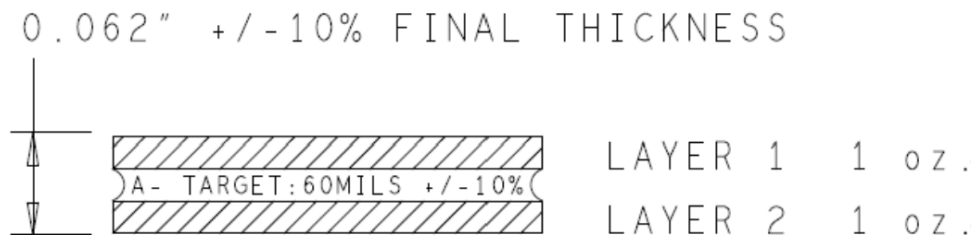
KW01-RCD-RD PCB stackup cross-section (two layer).
